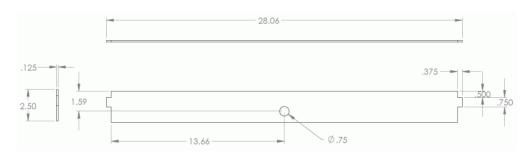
NEBS Cabinet Pad Mount Gasket Width Dimension
